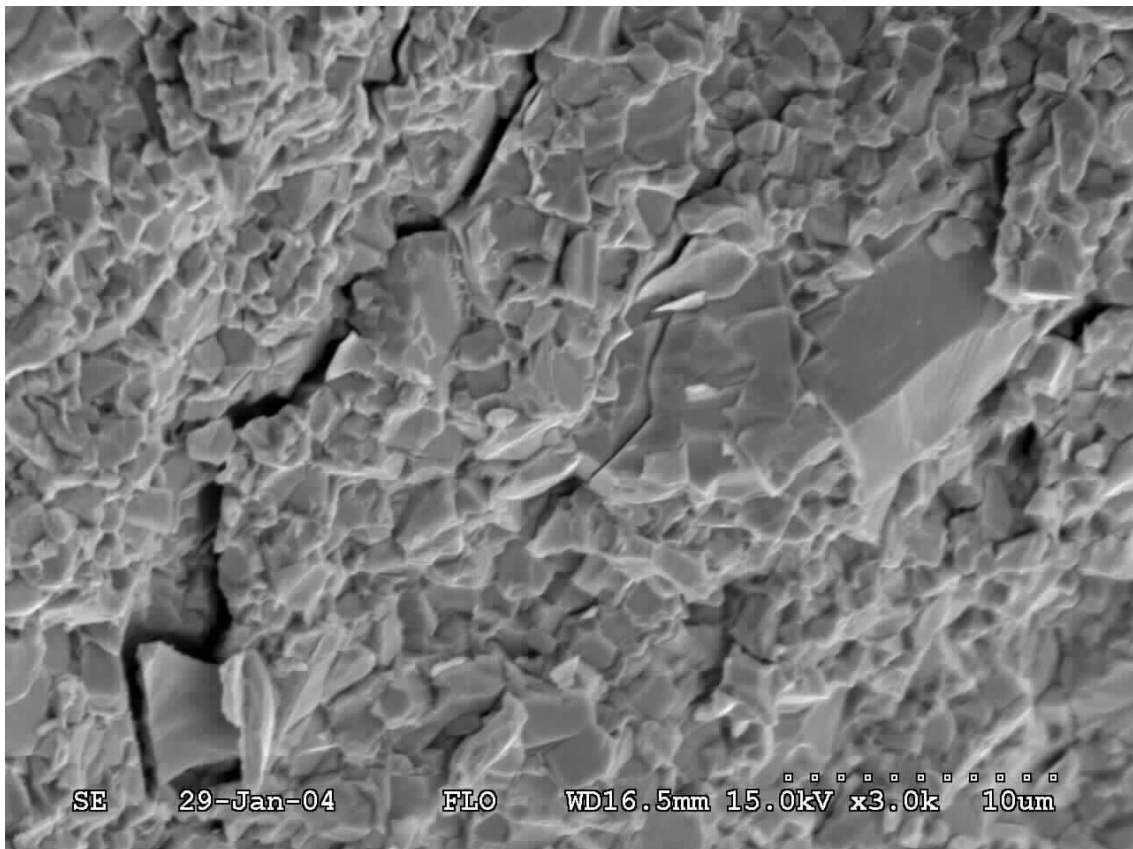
Fracture surface by compression with visible cracks. (Sandvik Hard Materials)
